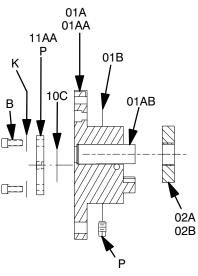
Head Coverplate Kit, Head Kit And Idler Disassembly
